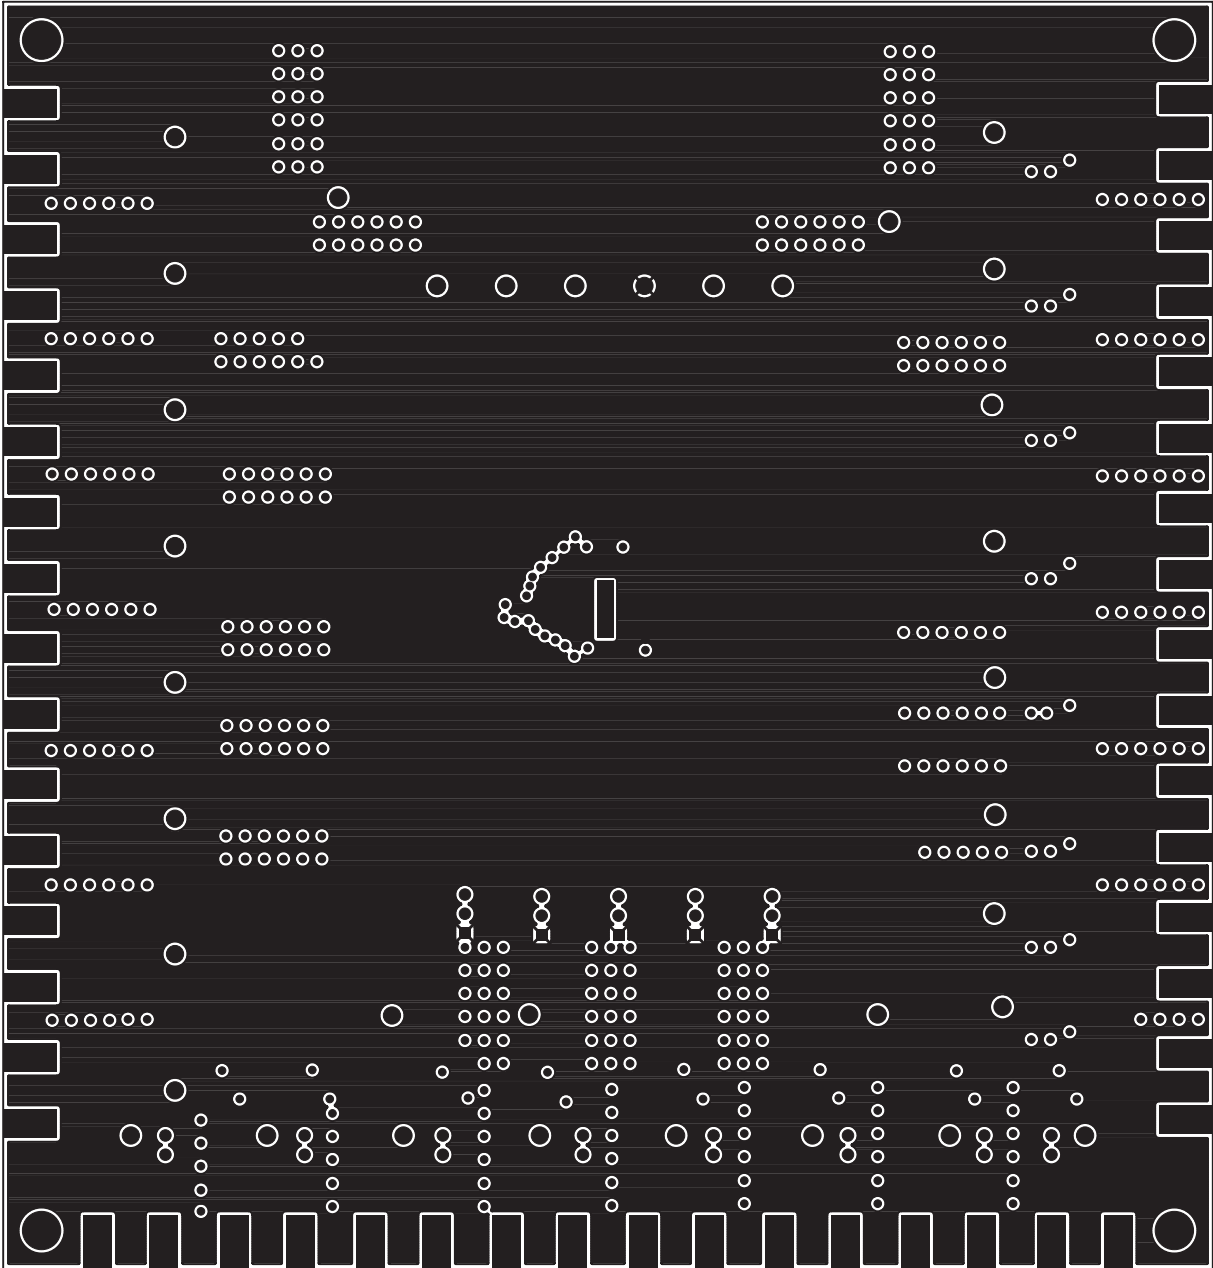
MAX4936A EV Kit PCB Layout—Layer 3 (Power)
